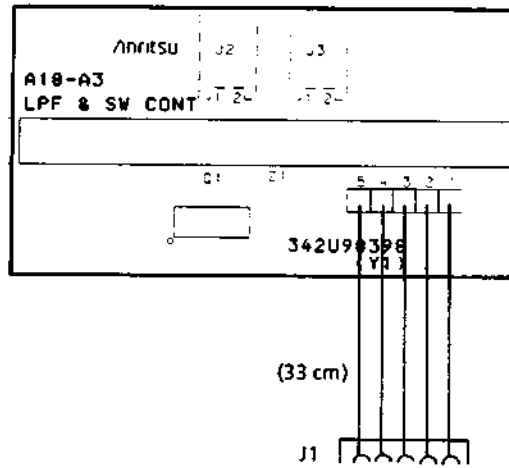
A18-A3 LPF & SW CONT PC-Board Parts Layout 46
